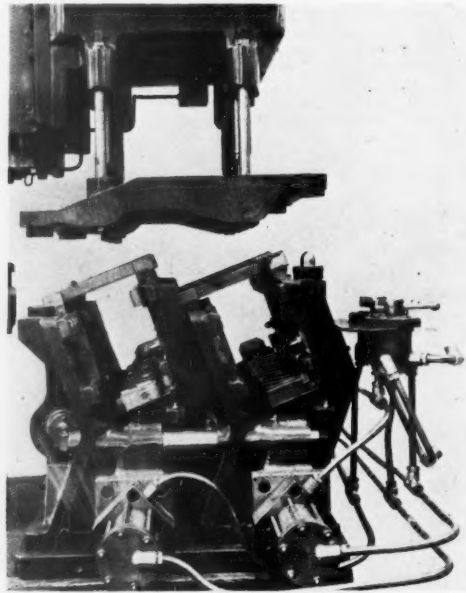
Drilling head and angular fixture used in drilling and spot facing the spark-plug holes in cylinder heads for petrol and vaporizing oil engines
